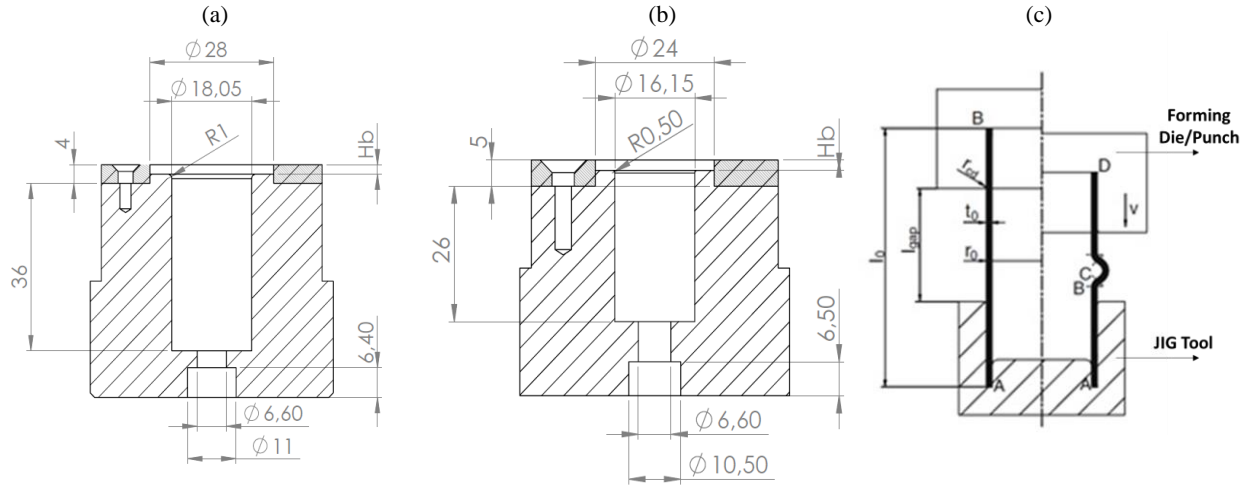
Technical drawing of the forming dies. (a) Reference E3, (b) E1 (cooler side), (c) schematic representation of the tool assembly and major process parameters.
